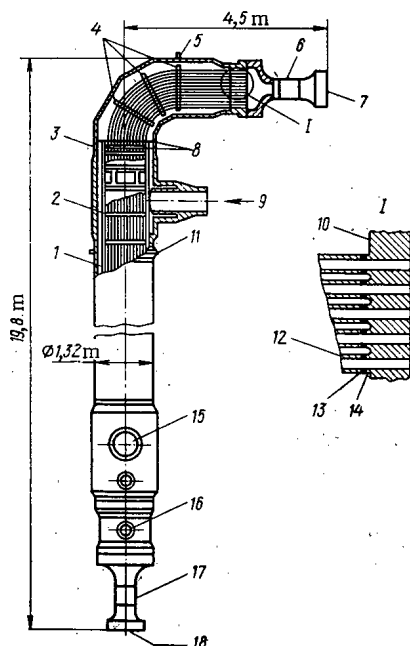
Single-walled pipe and multiple forced circulation steam generator manufactured by Atomics International: 1) frame; 2) pipe grid; 3) heat shield; 4) vibration guards; 5) ventilation hole; 6) 17) steam escape adapter; 7) steam outlet; 8) disc and thick sleeve baffles; 9) sodium inlet; 10) pipe panel; 11) compensator; 12) pipe (15.87 × 2.78 mm); 13) butt weld; 14) machine finish; 15) sodium outlet (two openings); 16) drain hole; 18) steam inlet (water).
